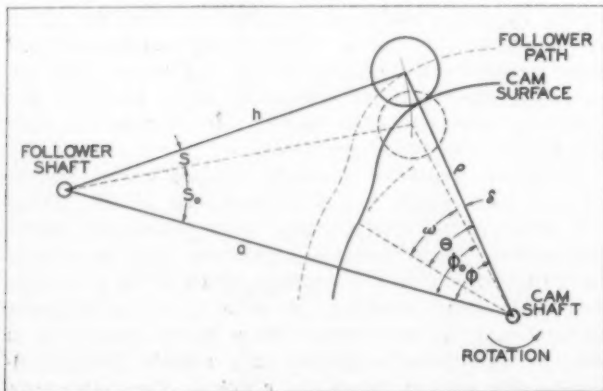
Above—Complementary cam and follower arrangement utilized in weaving machine
